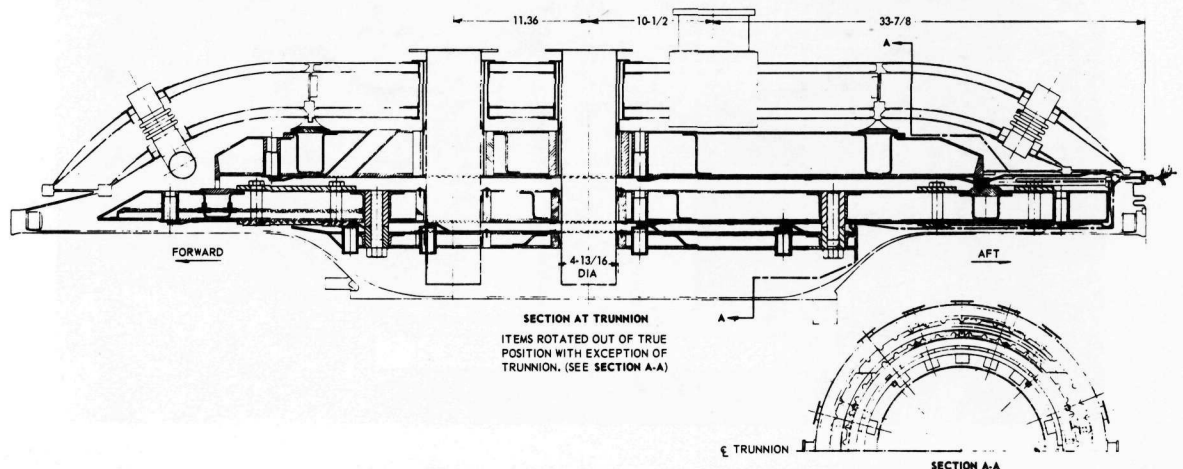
Primary shield assembly (Dwg. 134R606, Sh. 2)
